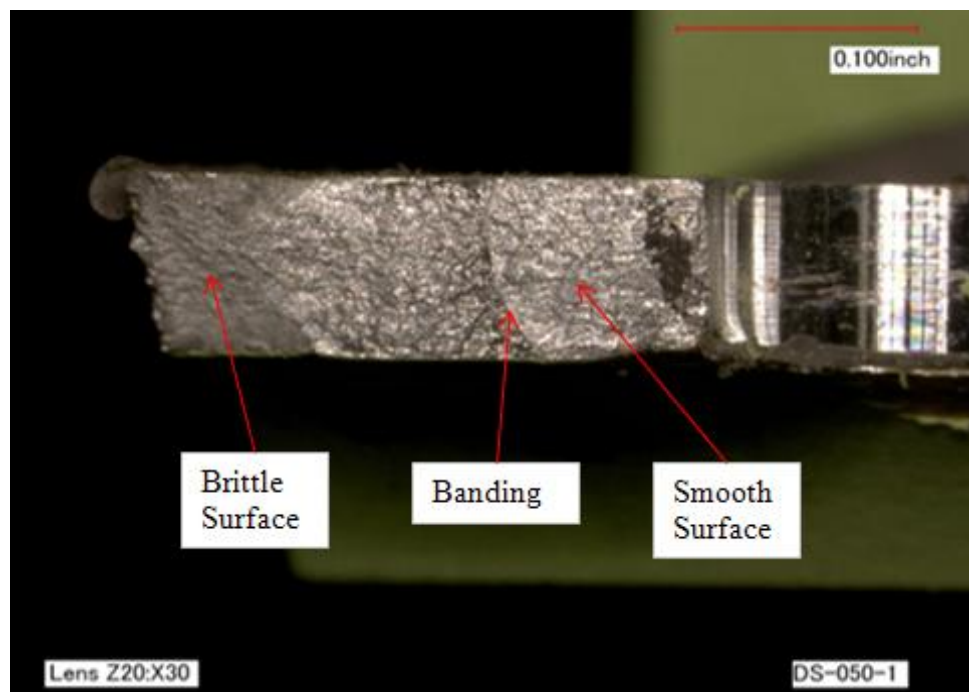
DS-050-1 Fatigue Fracture Surface (X30)
